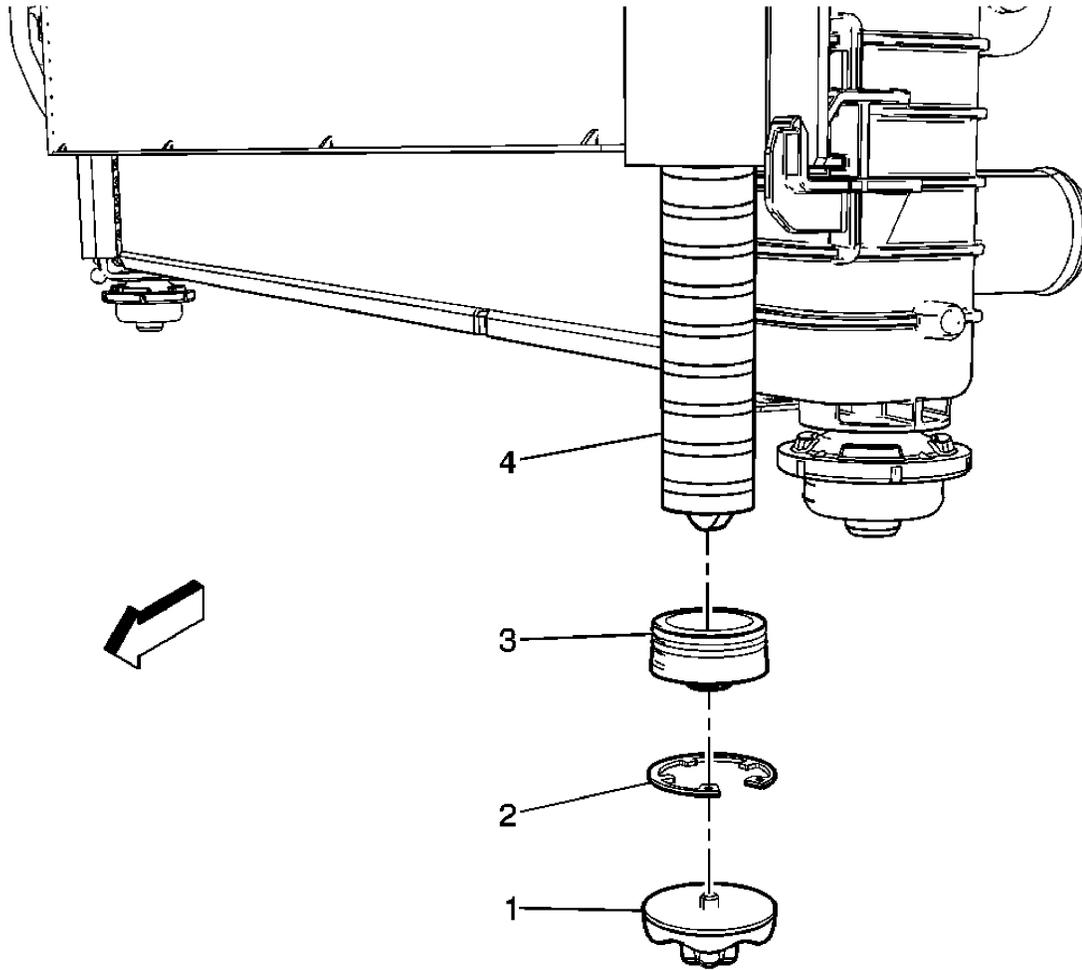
Identifying Air Conditioning Refrigerant Desiccant
